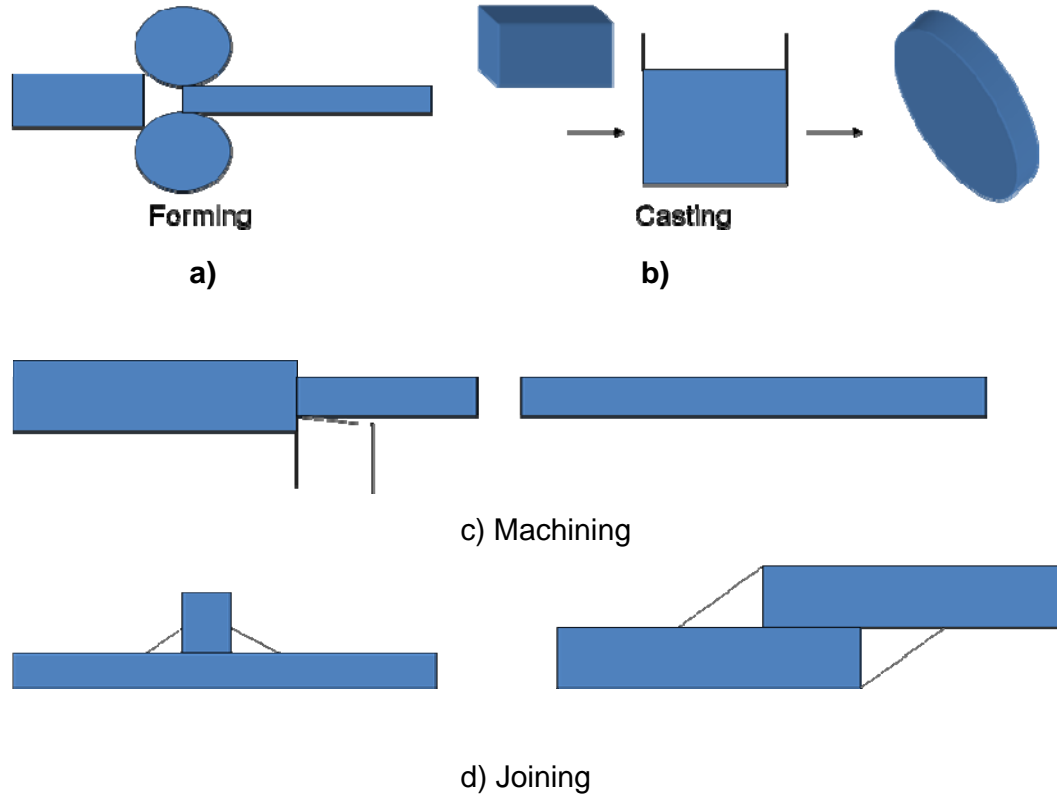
Schematic diagram showing shaping approaches using different manufacturing processes a) forming, b) casting, c) machining and d) joining
